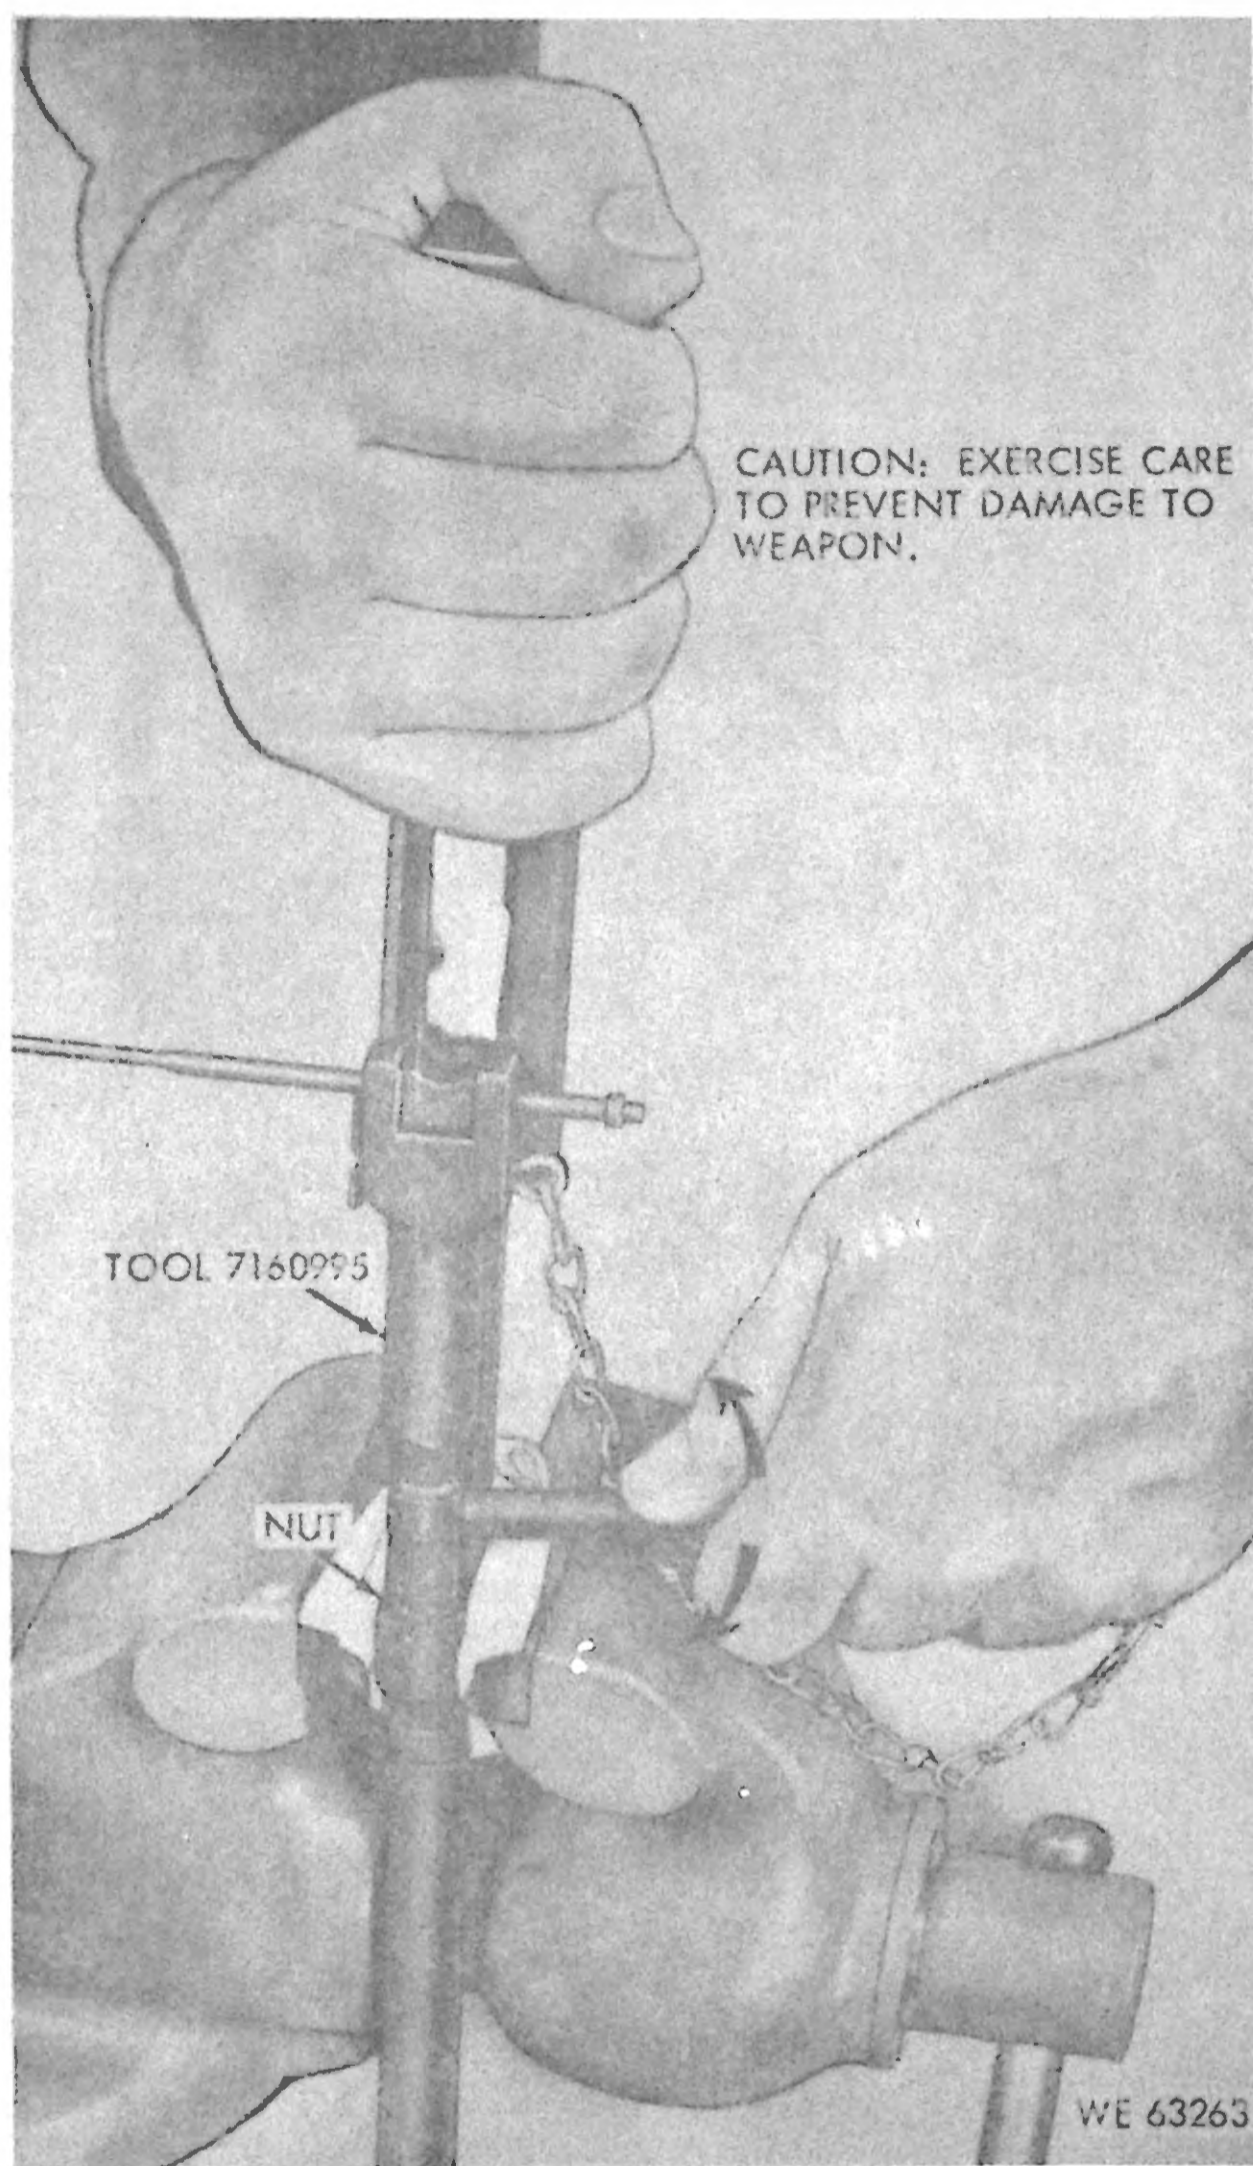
Removing and installing gas cylinder piston nut, using tool 7160995.
